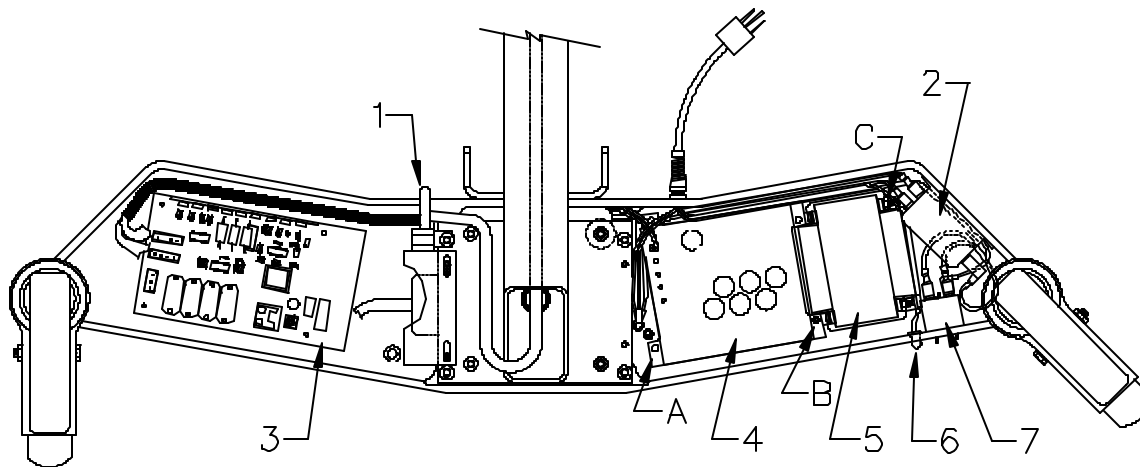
Head-end, bottom view – Power Supply and Control PCB Replacement
